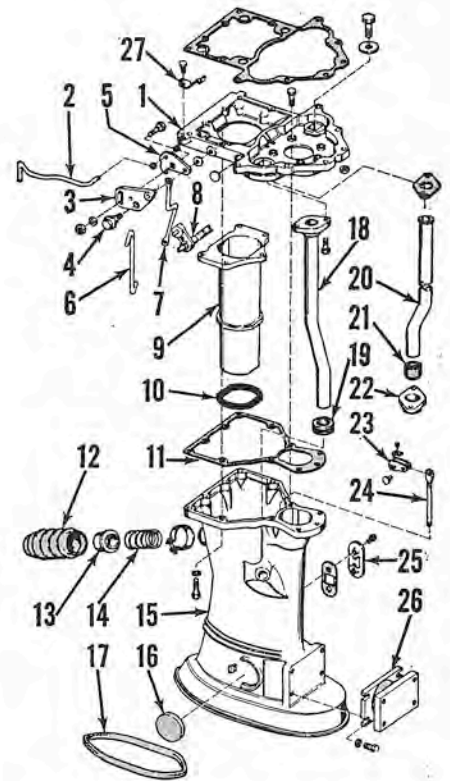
Exploded view of drive shaft housing, exhaust housing and associated parts used on 50 hp models.
